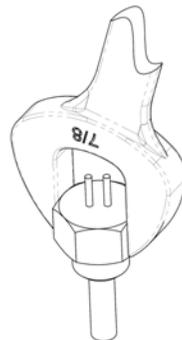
Positioning the Wrench to Remove the Oil Temperature Sensor
